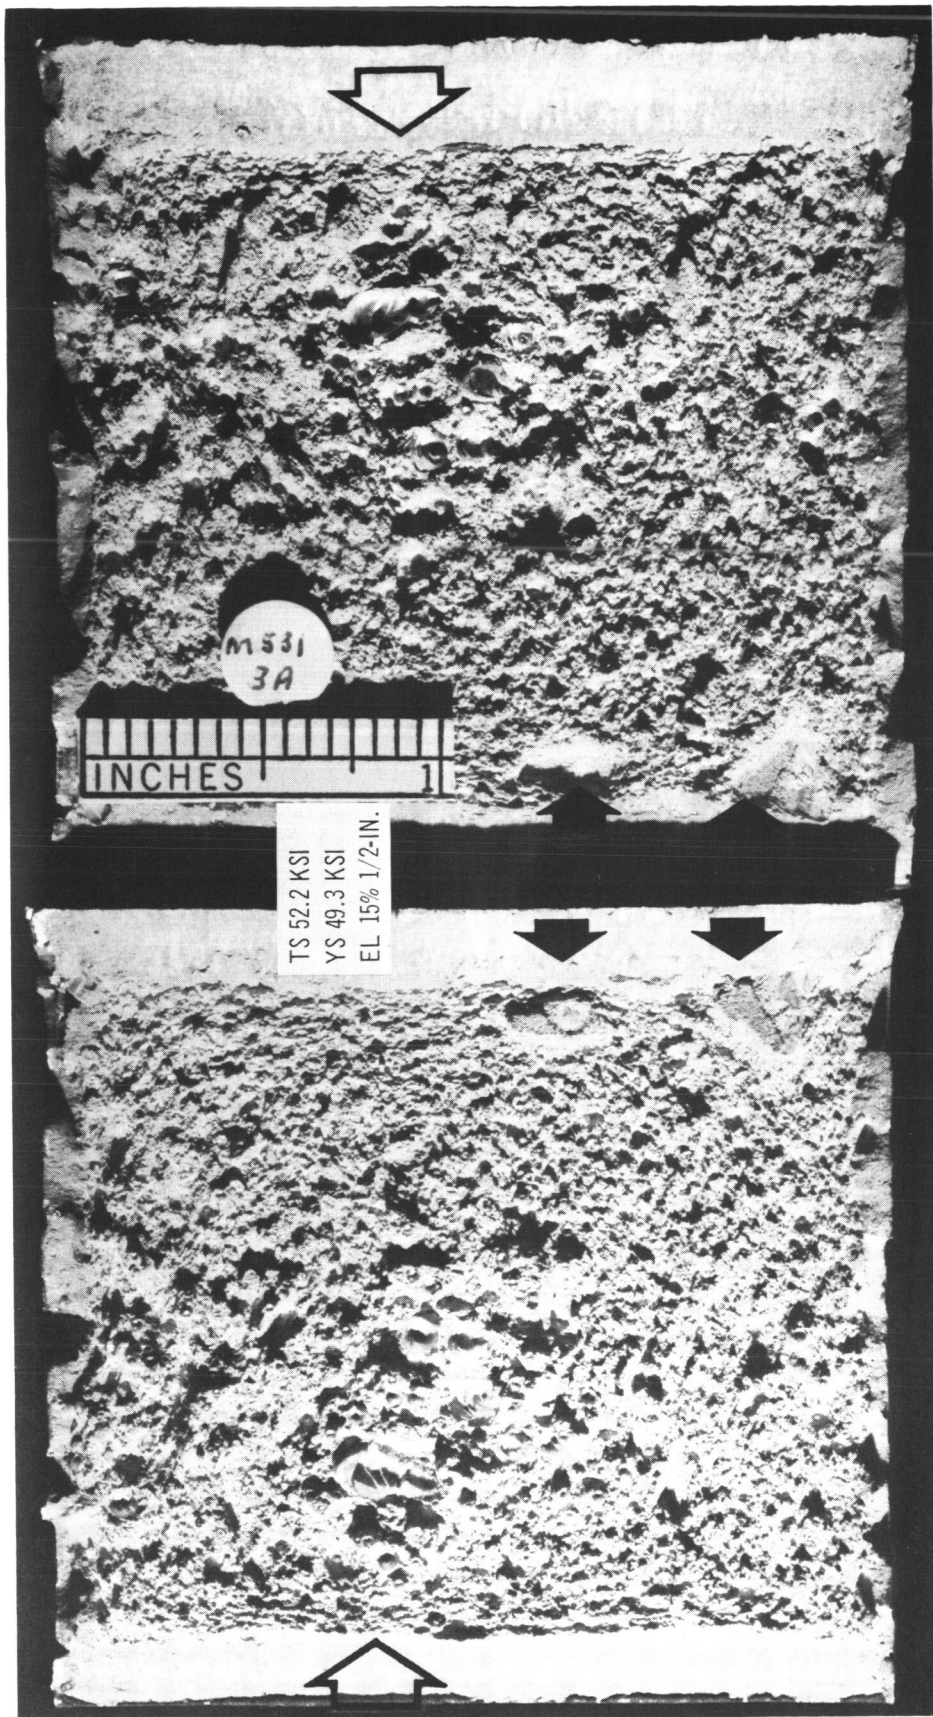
FRACTURE SURFACES OF 2-3/8-IN. THICK HIGH STRENGTH EB WELD.
